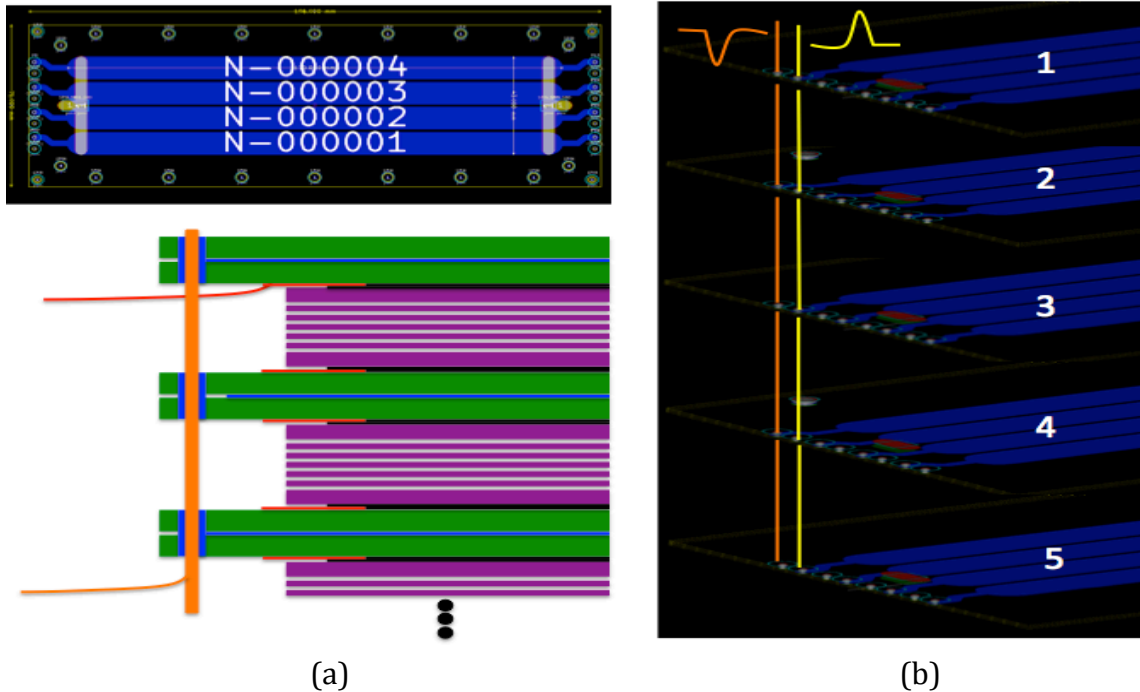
(a) Top, PCB design for 2nd prototype mRPC. Bottom, Side view
